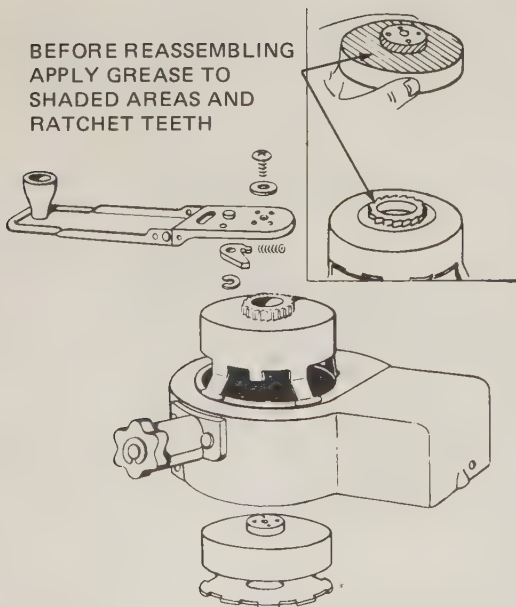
Partially disassembled windup starter. (Briggs & Stratton Corporation)
